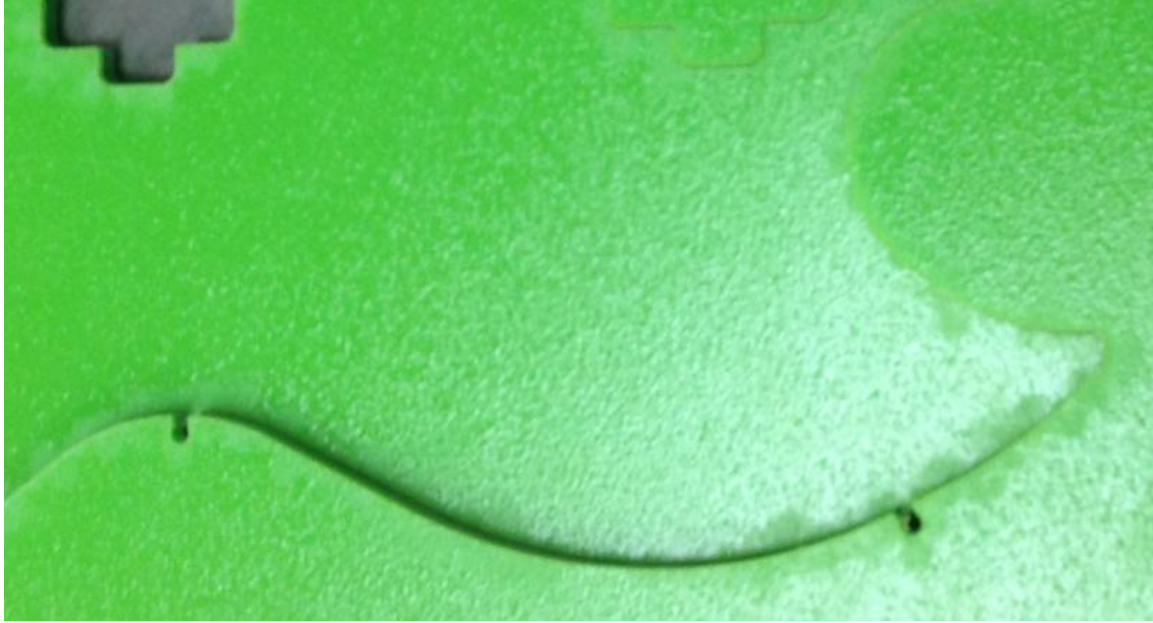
Example of Molten Copolyester Deposited Along Laser Cut Edges
